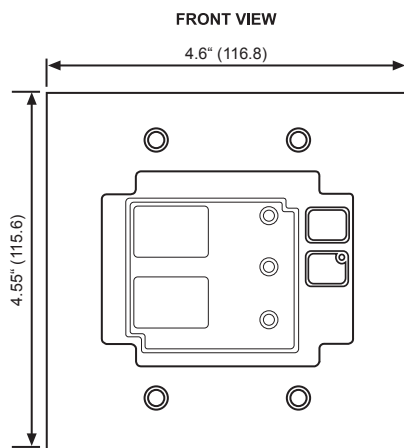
Two-gang wall plate dimensions in inches (mm)
